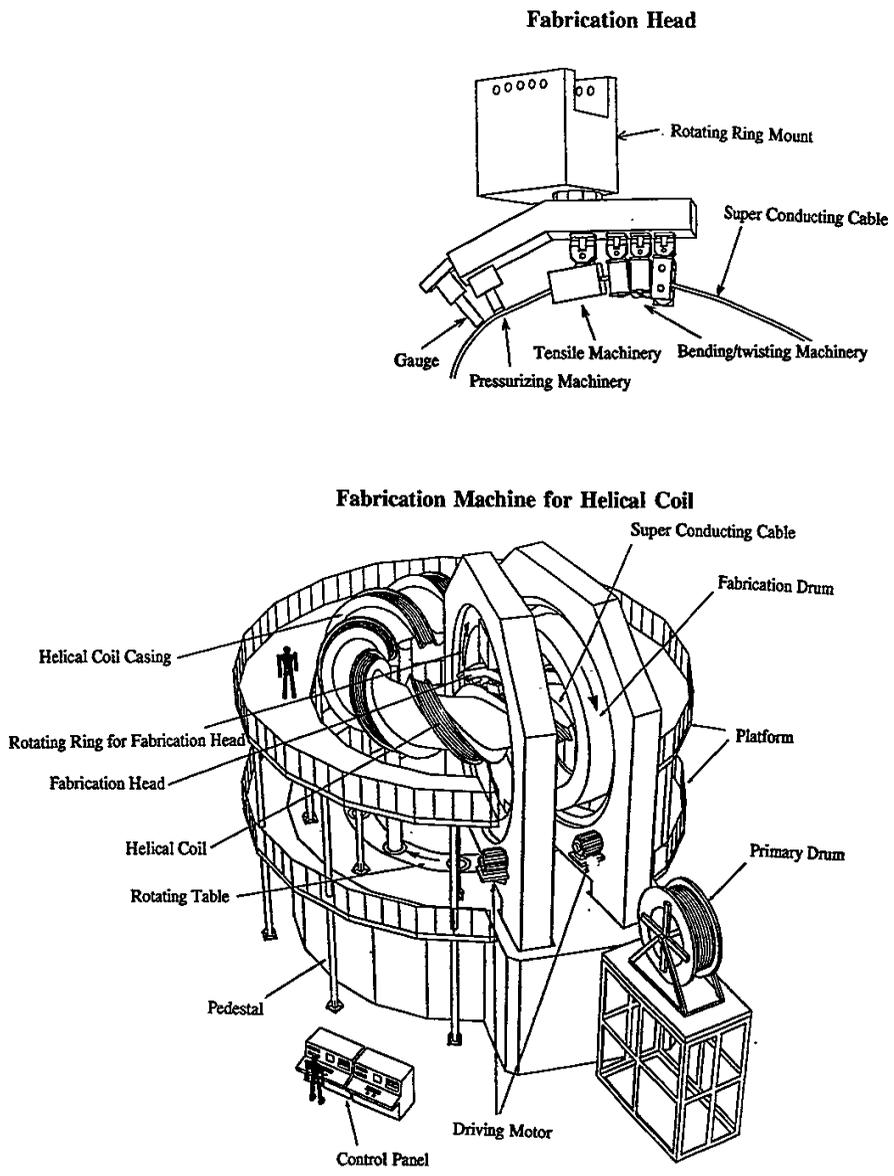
; A Bird's-Eye View of Fabrication Machine and Fabrication Head
